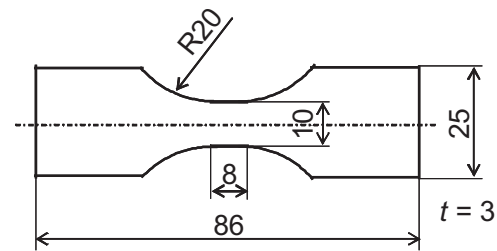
Shape and dimensions of specimen employed in tensile and fatigue tests (mm).
